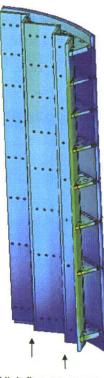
Typical Westinghouse Core Barrel Showing Weld Locations
